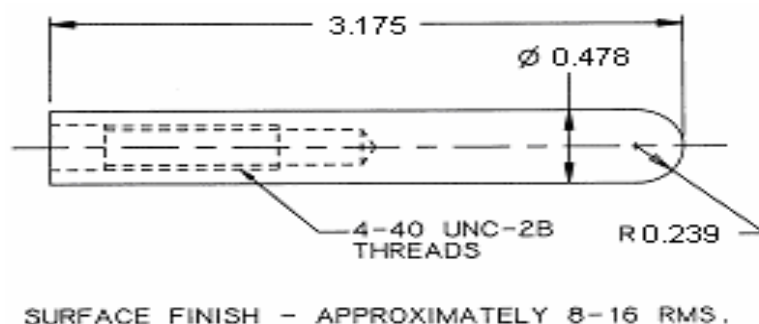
Engineering drawing of the EL400 working electrodes used for electrochemical tests (units in cm)
